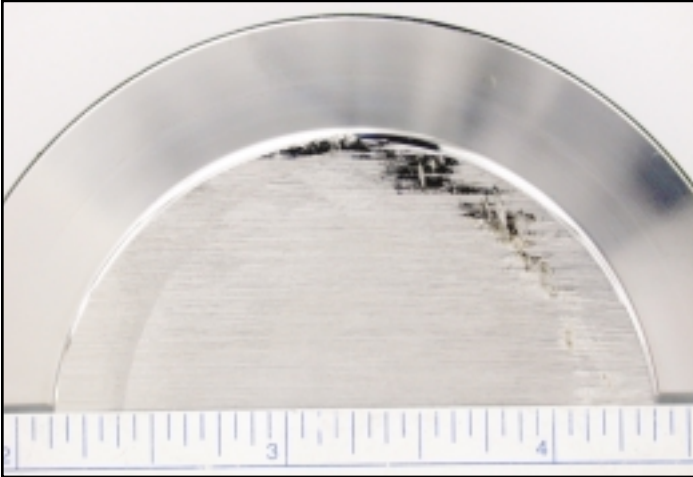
Visual Inspection of this machine shaft, shown on end, revealed a suspected crack at approximately mid-wall
